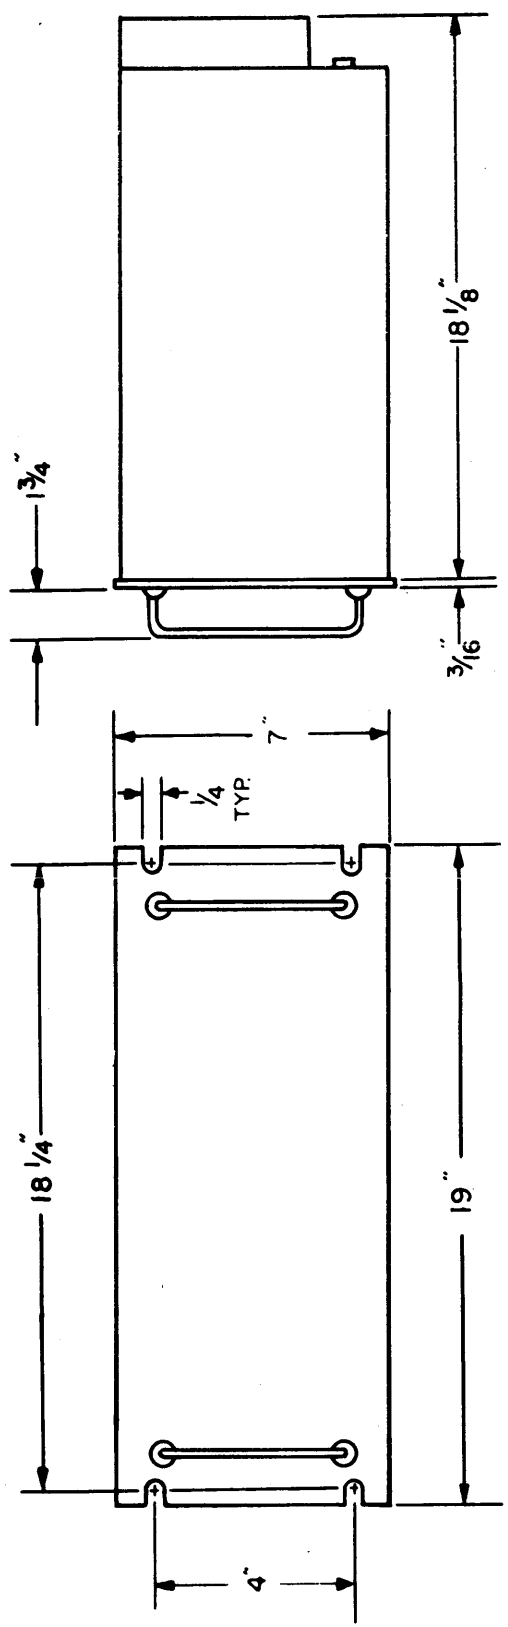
Outline Dimensional Drawing, SBS-1, 2
